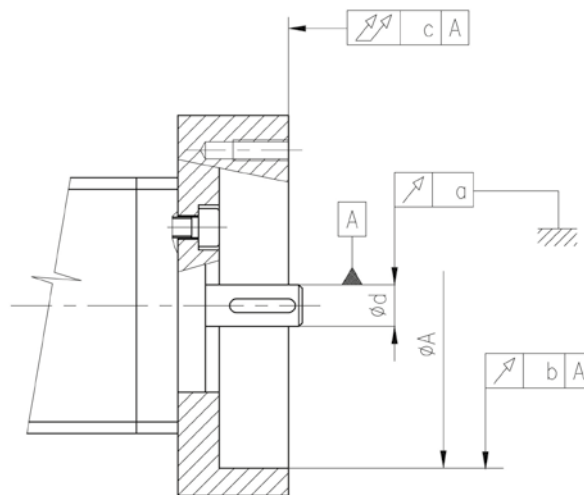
Tolerances of connecting parts M series / Tolerancie spojovacích častí M série
